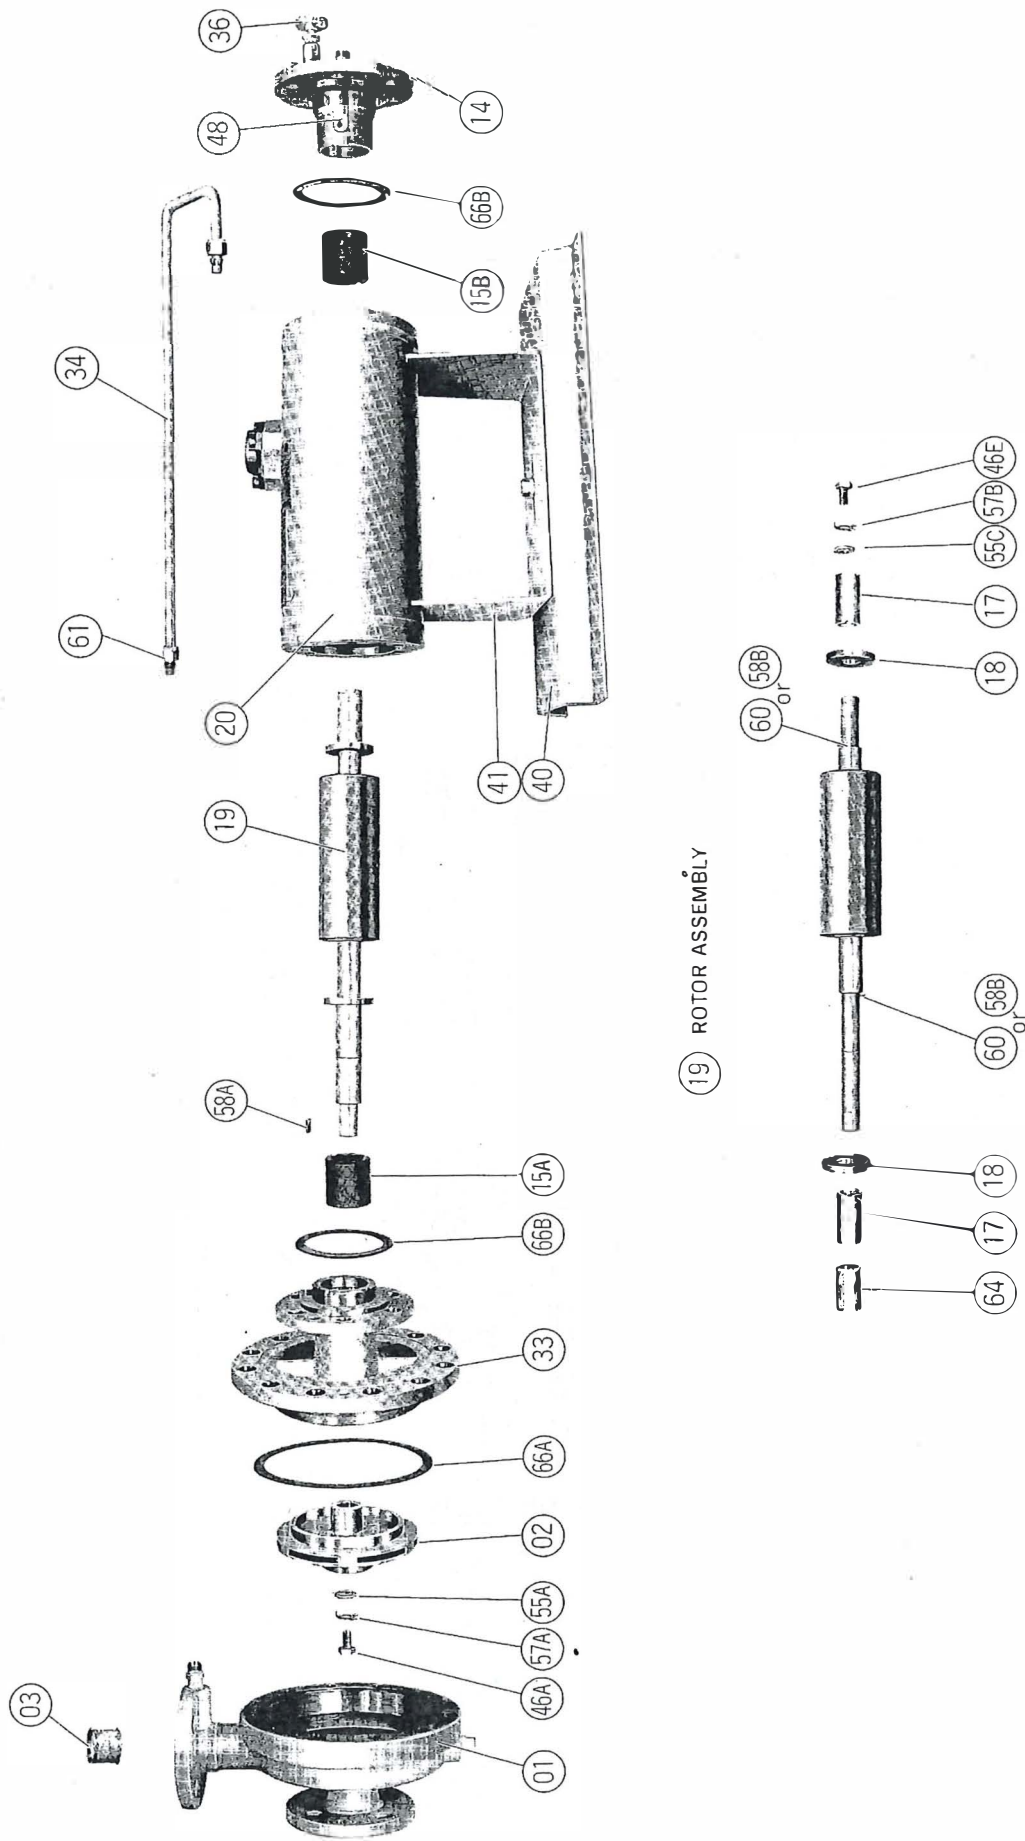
PUMP ASSEMBLY(FA-TYPE CIRCULATION PIPE CONSTRUCTION)
